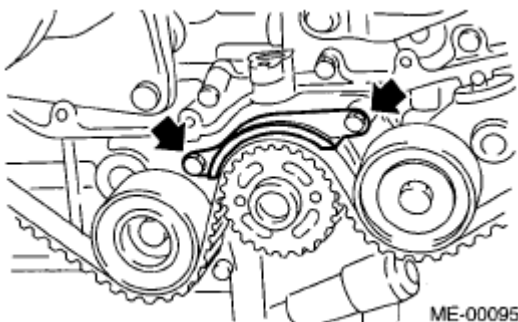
Identifying Timing Belt Guide Mounting Bolts (1 Of 4)
